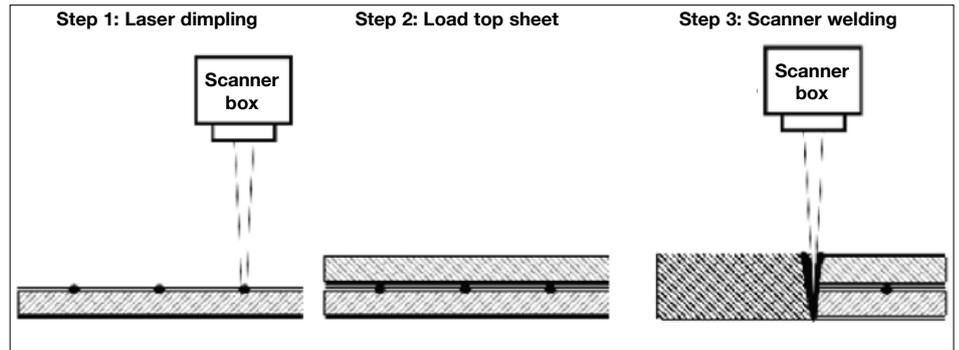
Process sequence for laser dimpling. The dimples generated by laser spot welding maintain the correct distance for ease of clamping. The laser parameter can be adjusted to produce a reproducible dimple height, typically between 0.1 mm and 0.2 mm.
